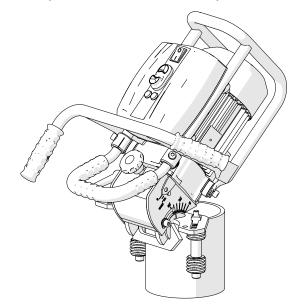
Machine prepared for work on smaller pipes (Ø150–300 mm, 6–12")
